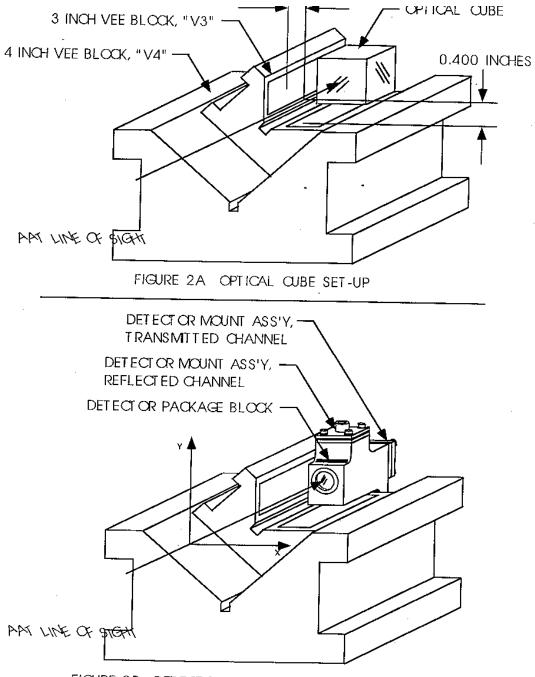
B DETECTOR PACKAGE ASSEMBLY SET-UP
